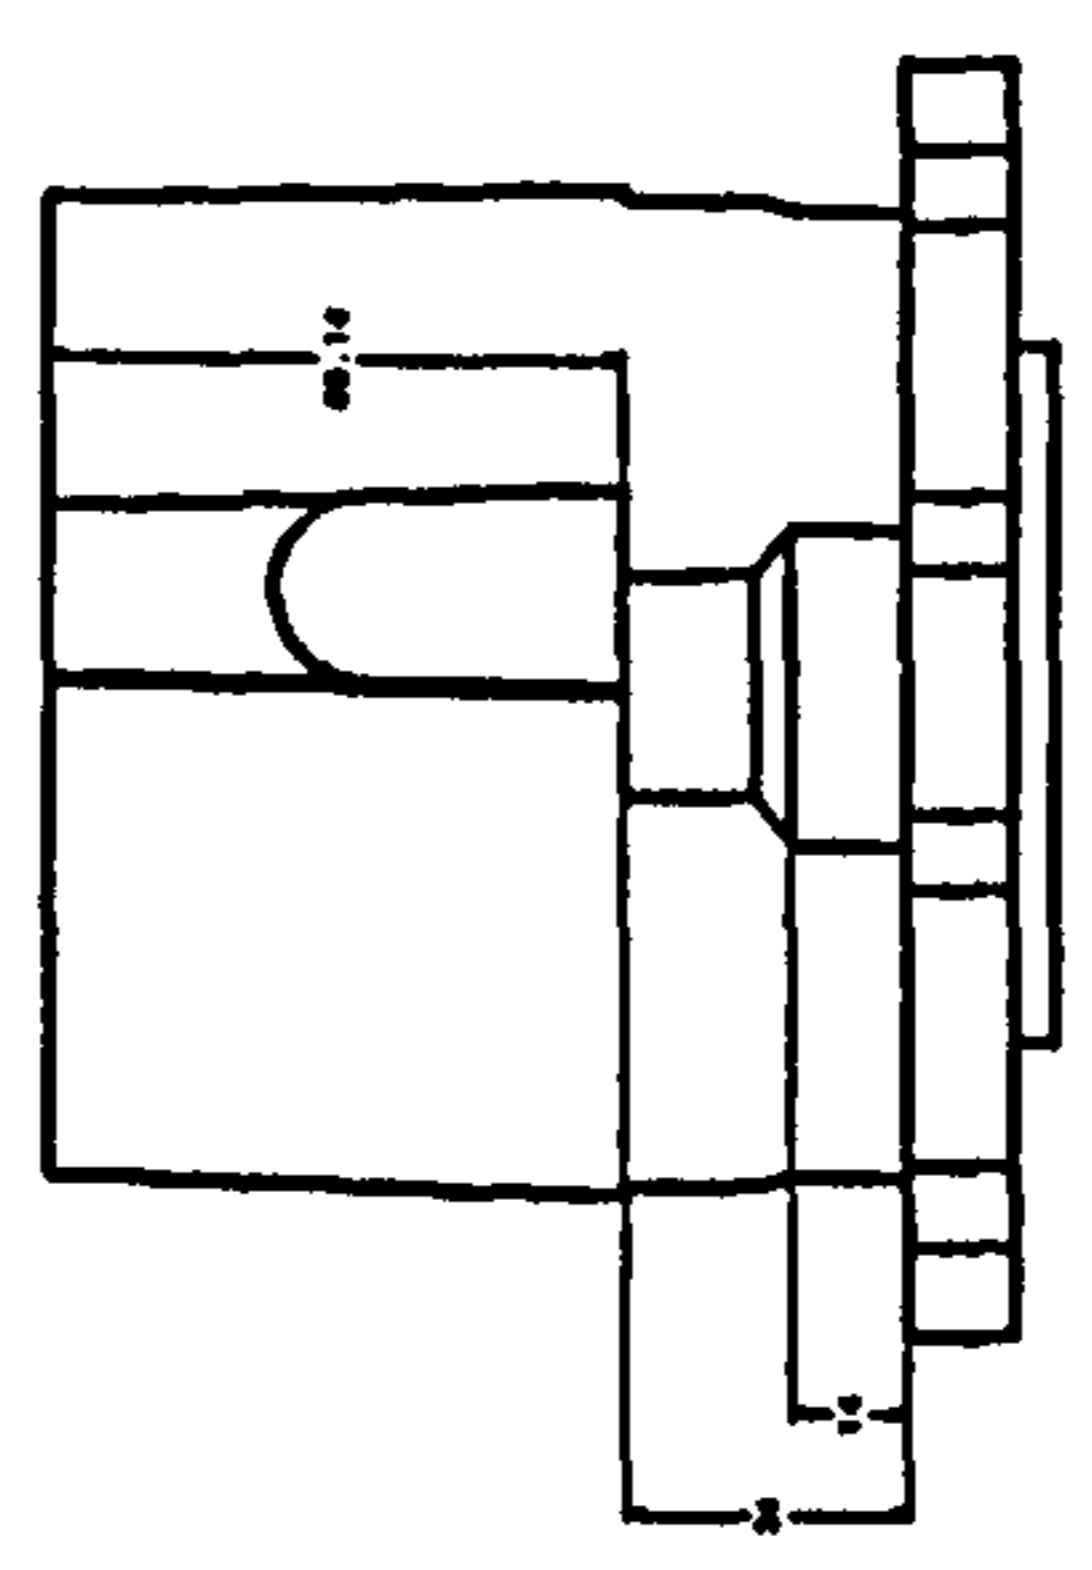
Drive-End-Shield No. V6211-673 – Manufacturing Drawing
